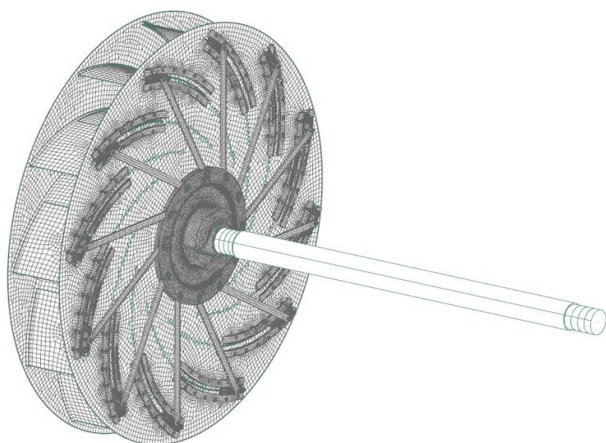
Discrete model of the impeller with adjusting mechanism and shaft
